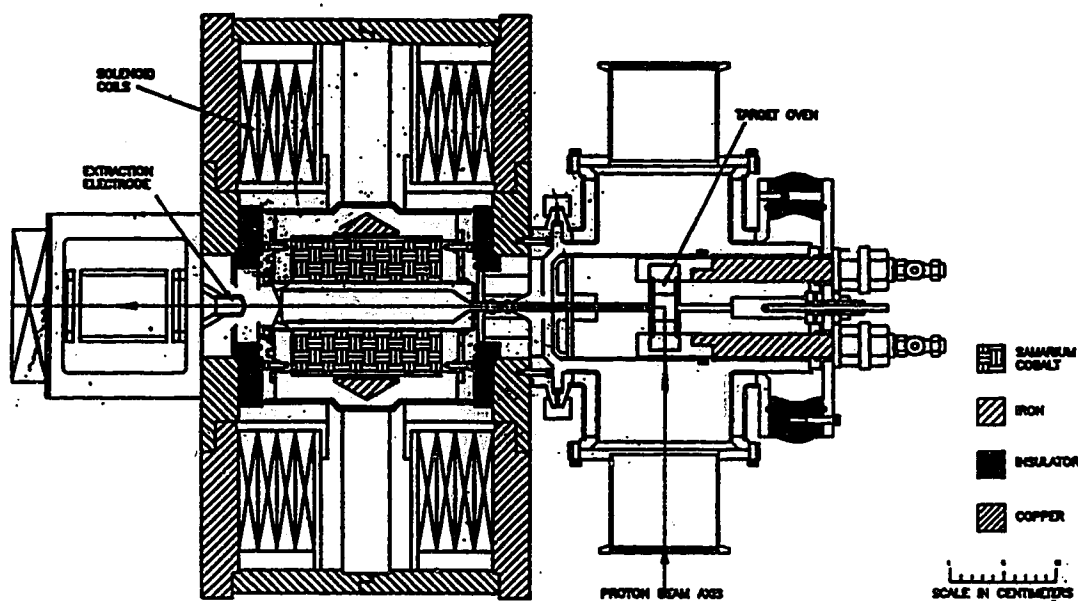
This diagram shows a top view of the ECRIS/TIS assembly.
